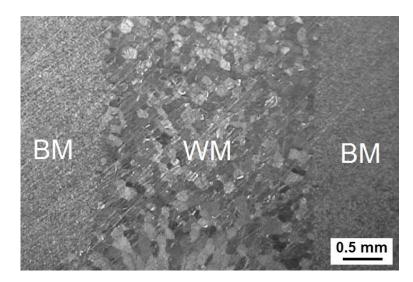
Macrostructure of welded joint. WM = Weld Metal; BM = Base Metal.
